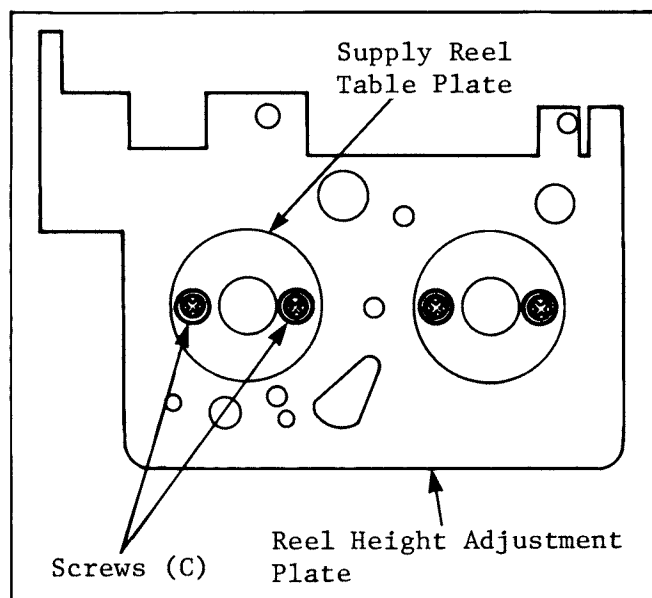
Removal of the Reel Height Adjustment Plate
